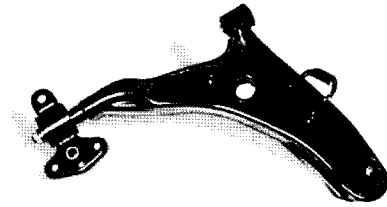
(a) A conventional stamping-welded lower arm assembly
